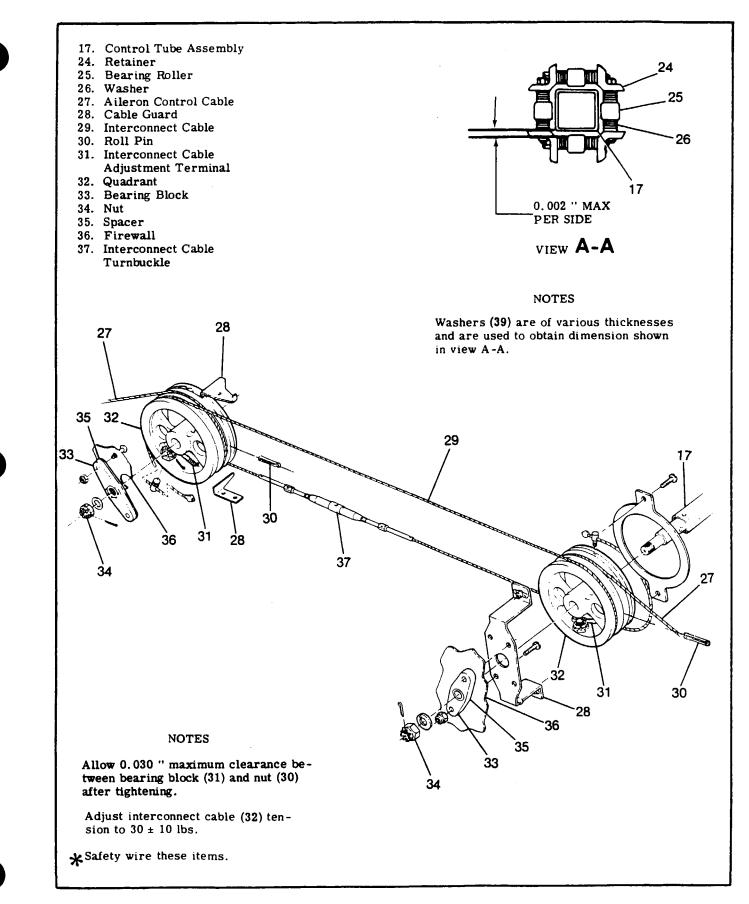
Control Column Installation (Sheet 1 of 3)
